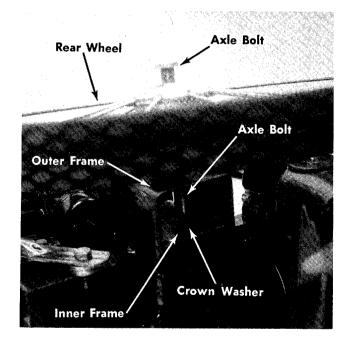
CROWN WASHER LOCATION FOR REAR WHEEL
